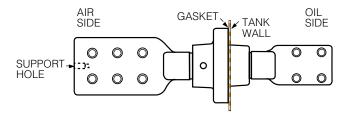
3010-4515 A, 1.2 kV class secondary bushing with clamping flange (in-line version shown).
